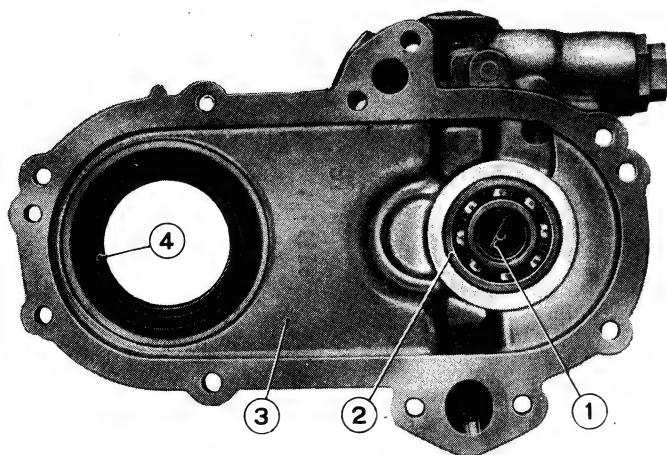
118 B.000 engine oil pump - Interior view.
